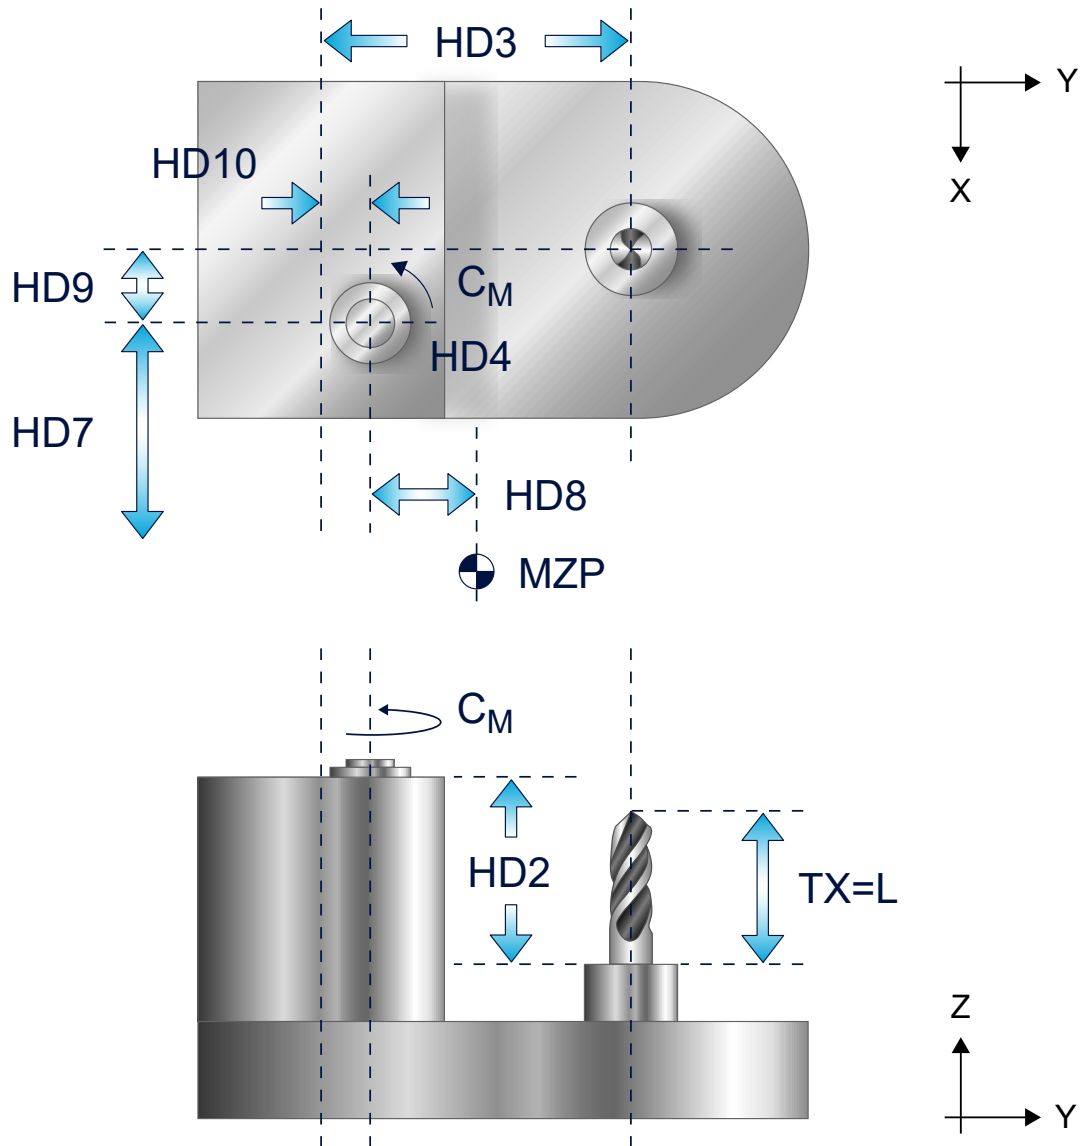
Tool head for underfloor milling (zero position where HD4 = 0)
